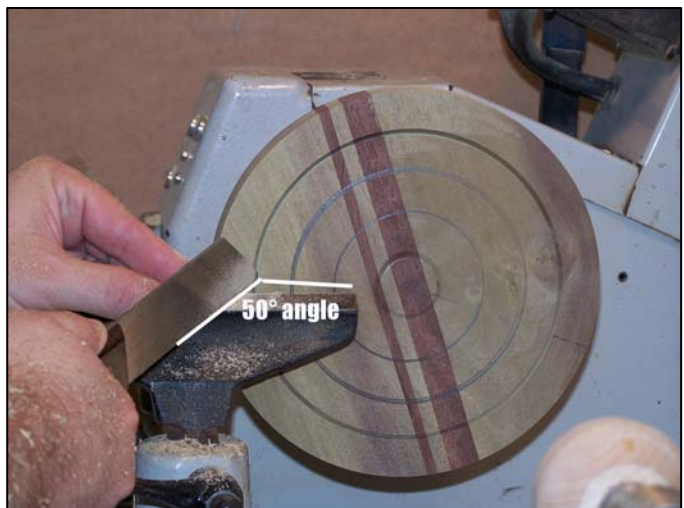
Using a very narrow parting tool, start cutting your rings from the outside. Keep the tool at a 50° to 60° angle to the piece, pointing towards the center (tailstock removed for photo only)
